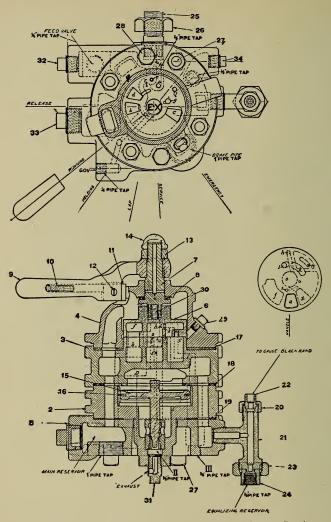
The H-6 Automatic Brake Valve. Cross Section.
